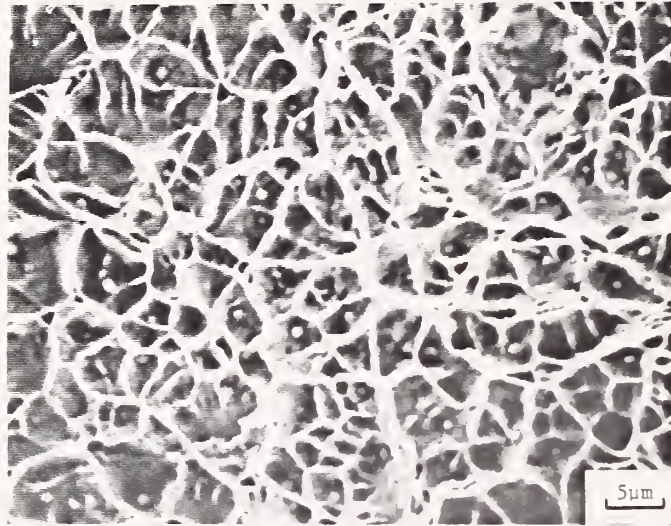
Fracture surface of GMA tensile specimen.
